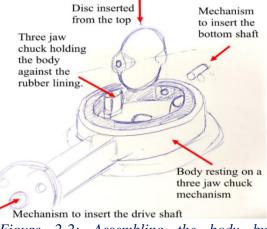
Assembling the body by mounting and centering it over a three jaw chuck mechanism.
